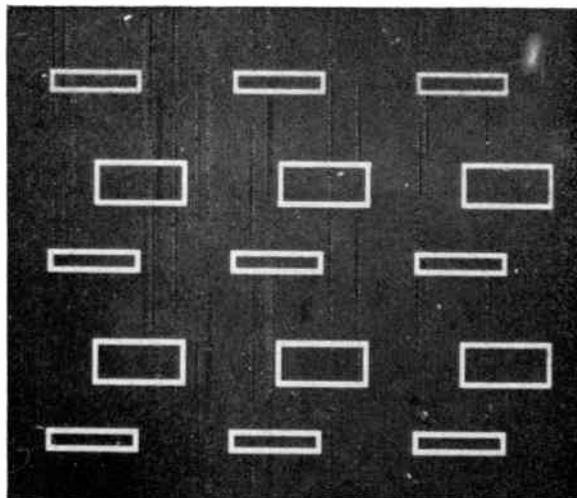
Frame for pattern of Fig. 8 machined with He-Ne laser.
